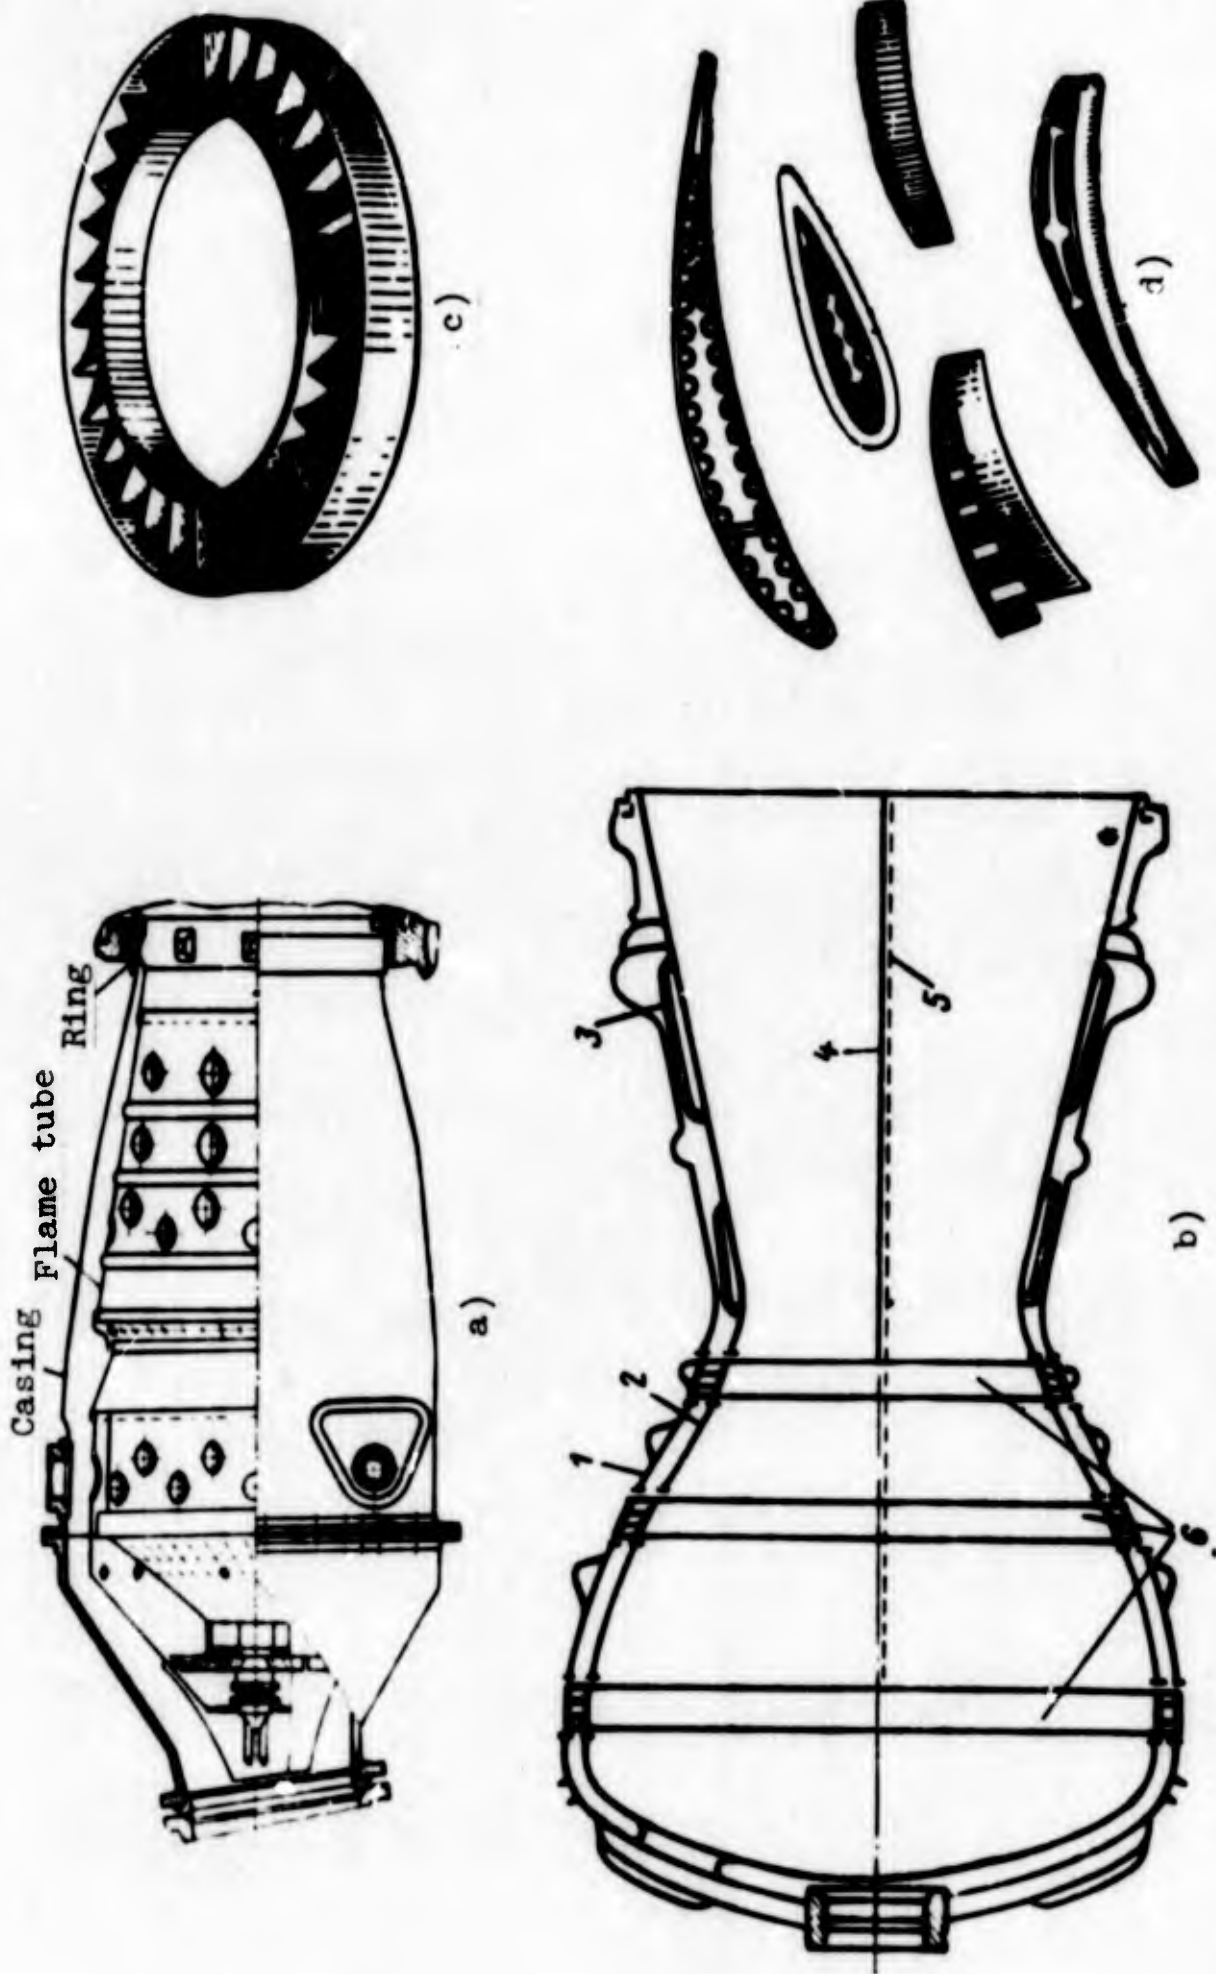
Units made from sheet material. a) combustion chamber of gas-turbine engine (GTE); b) combustion chamber of liquid-fuel rocket engine (LFE); c) nozzle ring of GTE turbine; d) cooled blades (cross section). 1) outer shell; 2) inner shell; 3) liner; 4) joint seam of inner shell; 5) joint seam of outer shell; 6) ring.
